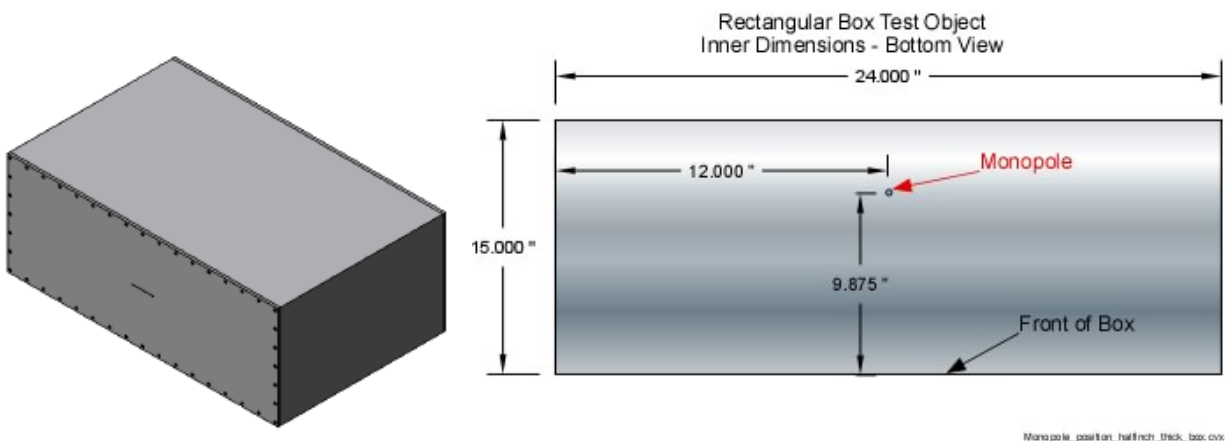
Drawing of the rectangular box test object with the single slot plate installed.
